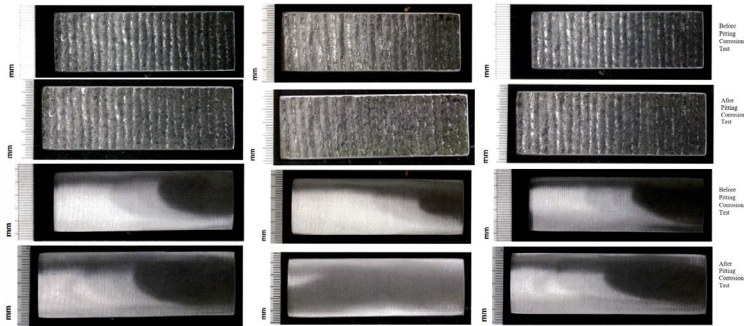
Macro-photography before and after Pitting Corrosion Test (1mm, 2mm, 3mm specimen)
